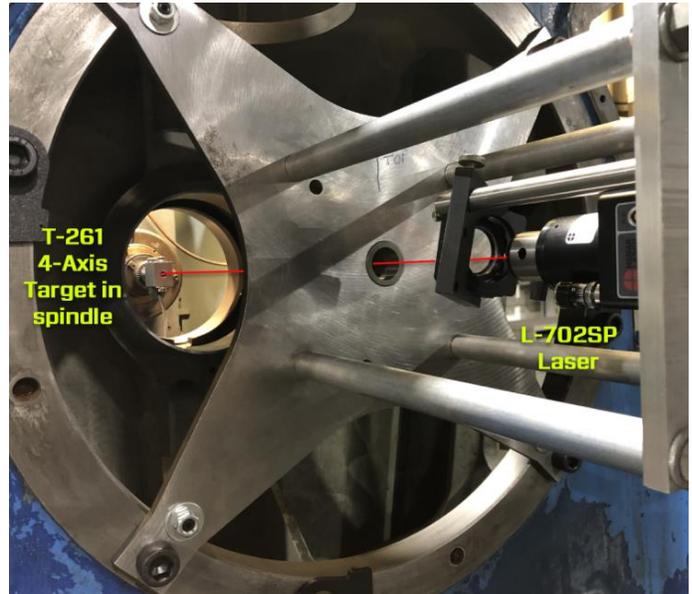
Close-up of L-702SP Setup with T-261 4-Axis Target Inserted in Spindle
